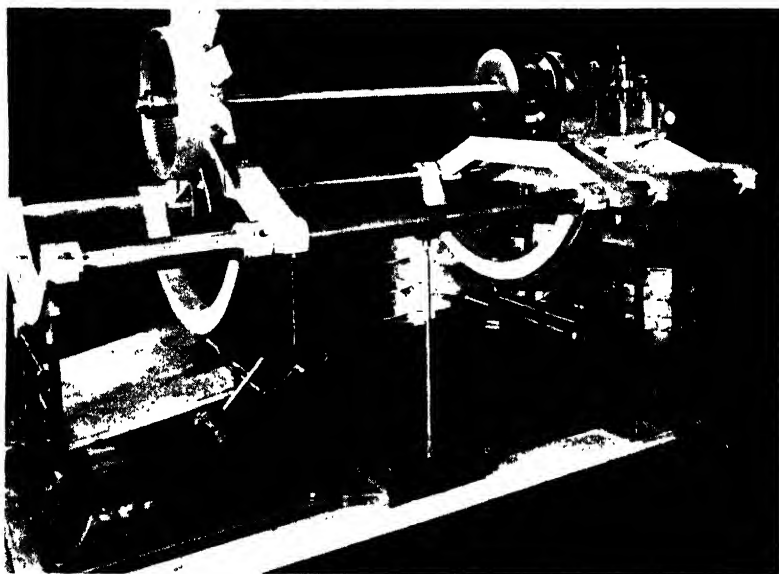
Flywheels, Clutch Plates, Fans, and Spring Housings are Checked for Balance with this Equipment
